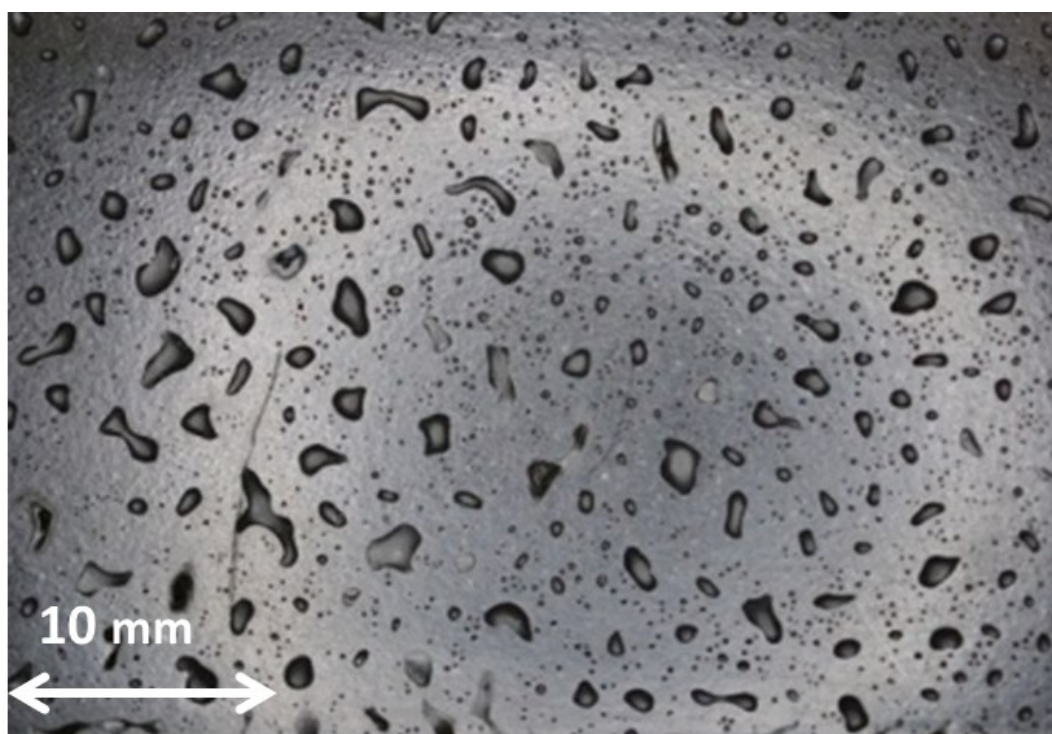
Pin holes on the surface of rotomoulded rectangular box test moulding (50 % wt. fly-ash/PE).
